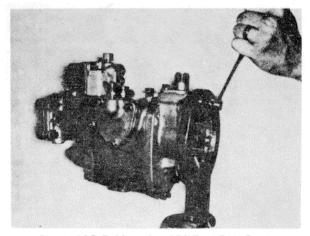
G-7. Mounting AFC Type Fuel Pump to 3375133 Mounting Plate
